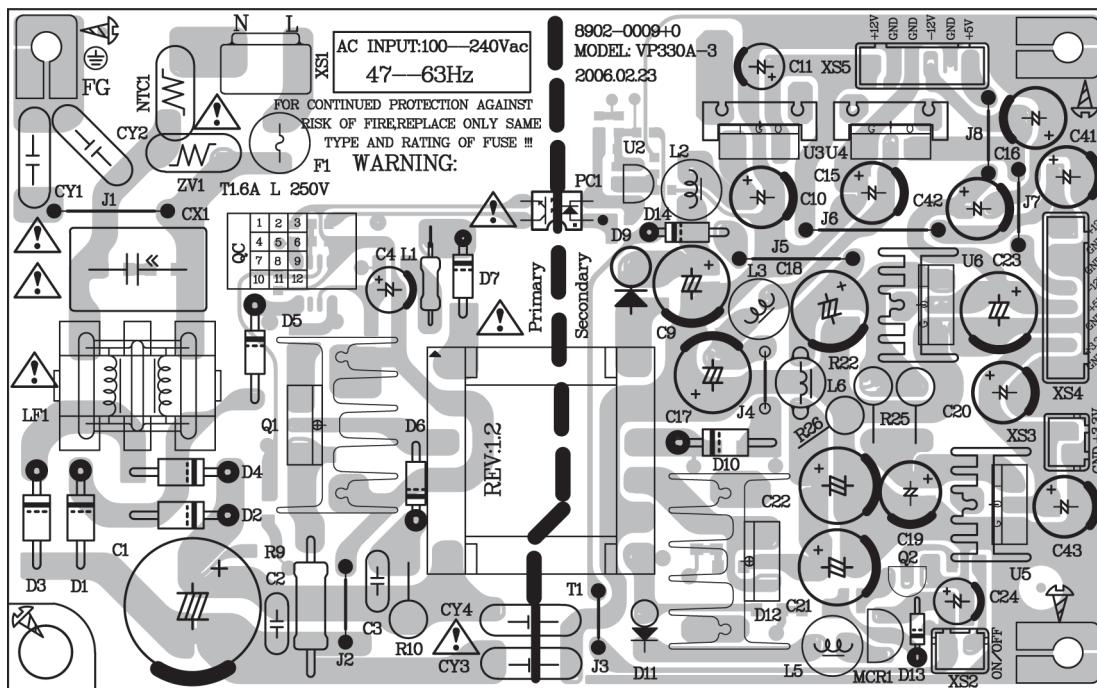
Switch Mode Power Supply PCB Top Etch and Component Layout
